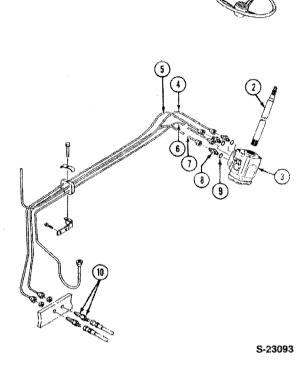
Power Steering Tubes - Model 1320/1520 Shown
